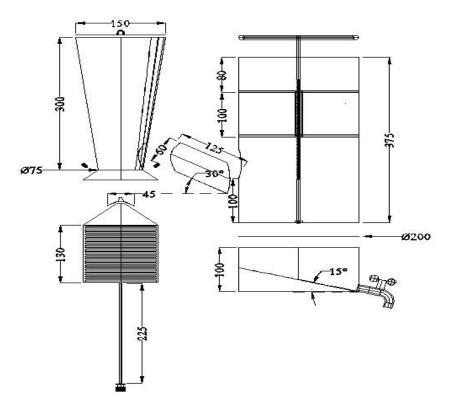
Detailed dimensioning of the fabricated Pulper and Presser showing vital components
